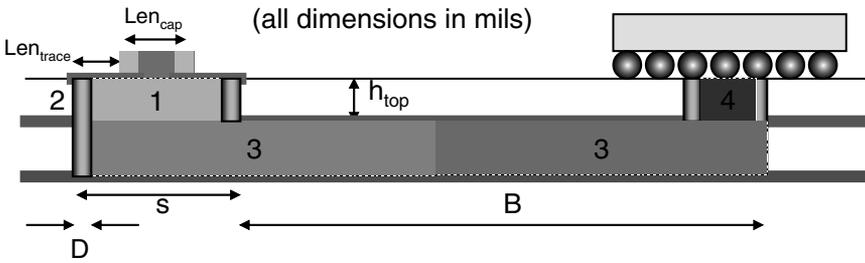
Cross section of a board with a 0.5-mil-thick layer of DuPont Interra HK04 laminate between the power and ground planes, close to the bottom surface of the board.
